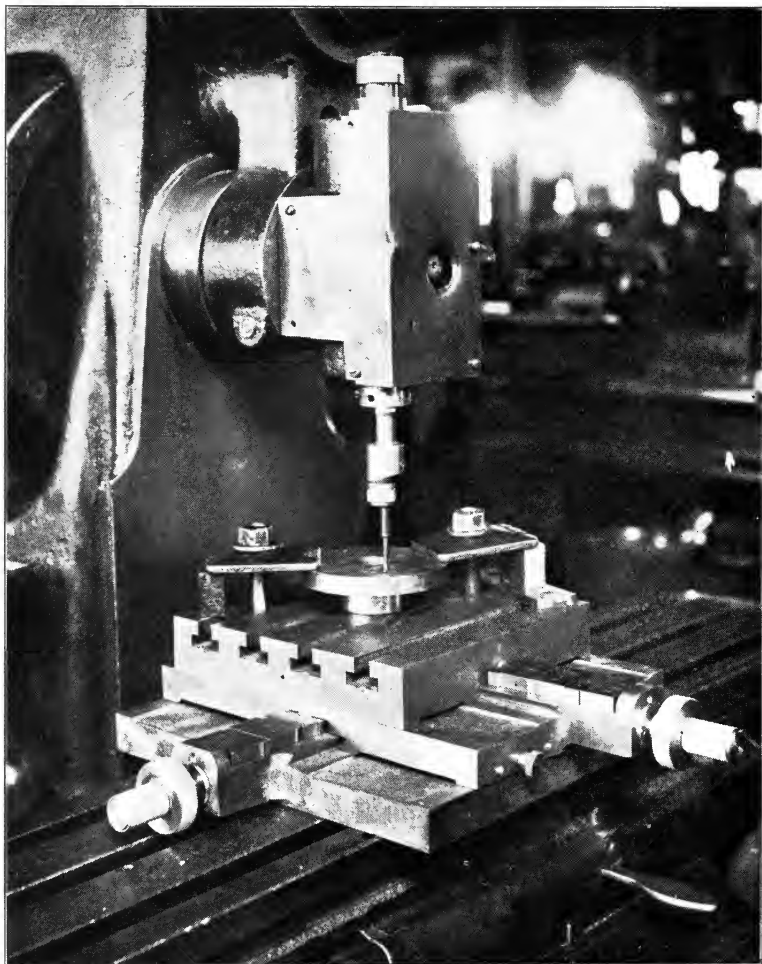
Special Milling Fixture Using Johansson Gage Blocks for Locating Purposes
